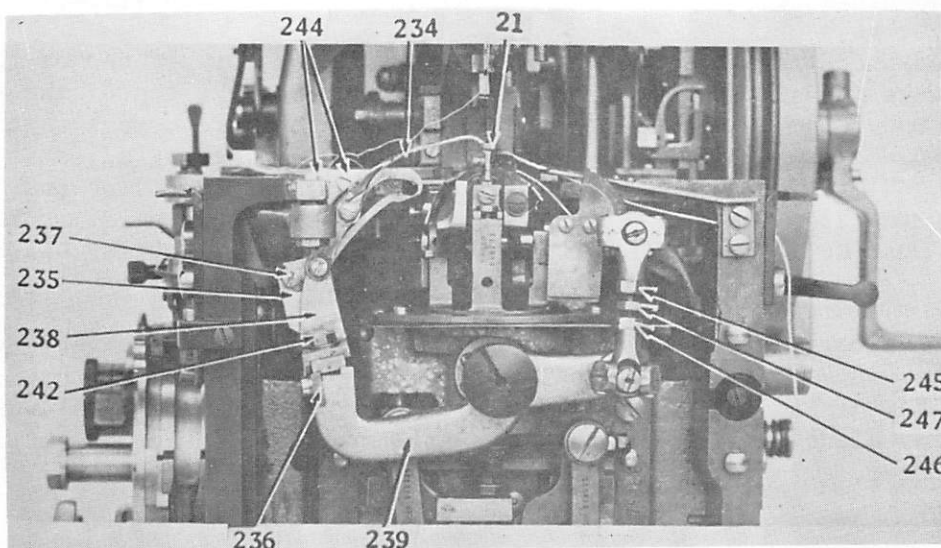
Adjustments on Under Thread and Cord Trimming Mechanism
